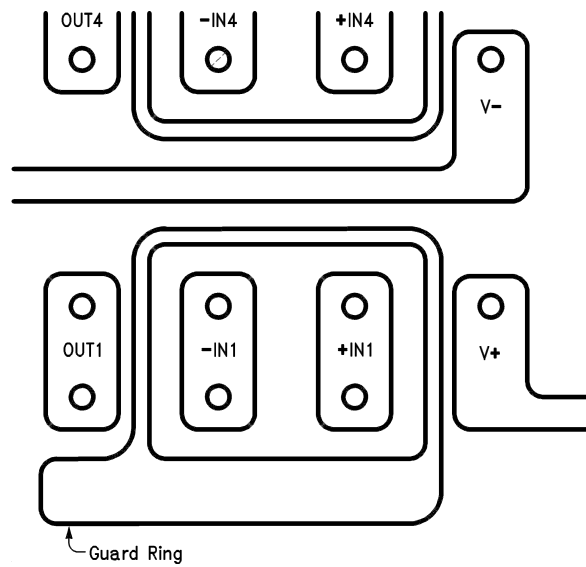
Example of Guard Ring in P.C. Board Layout, using the LPC662
